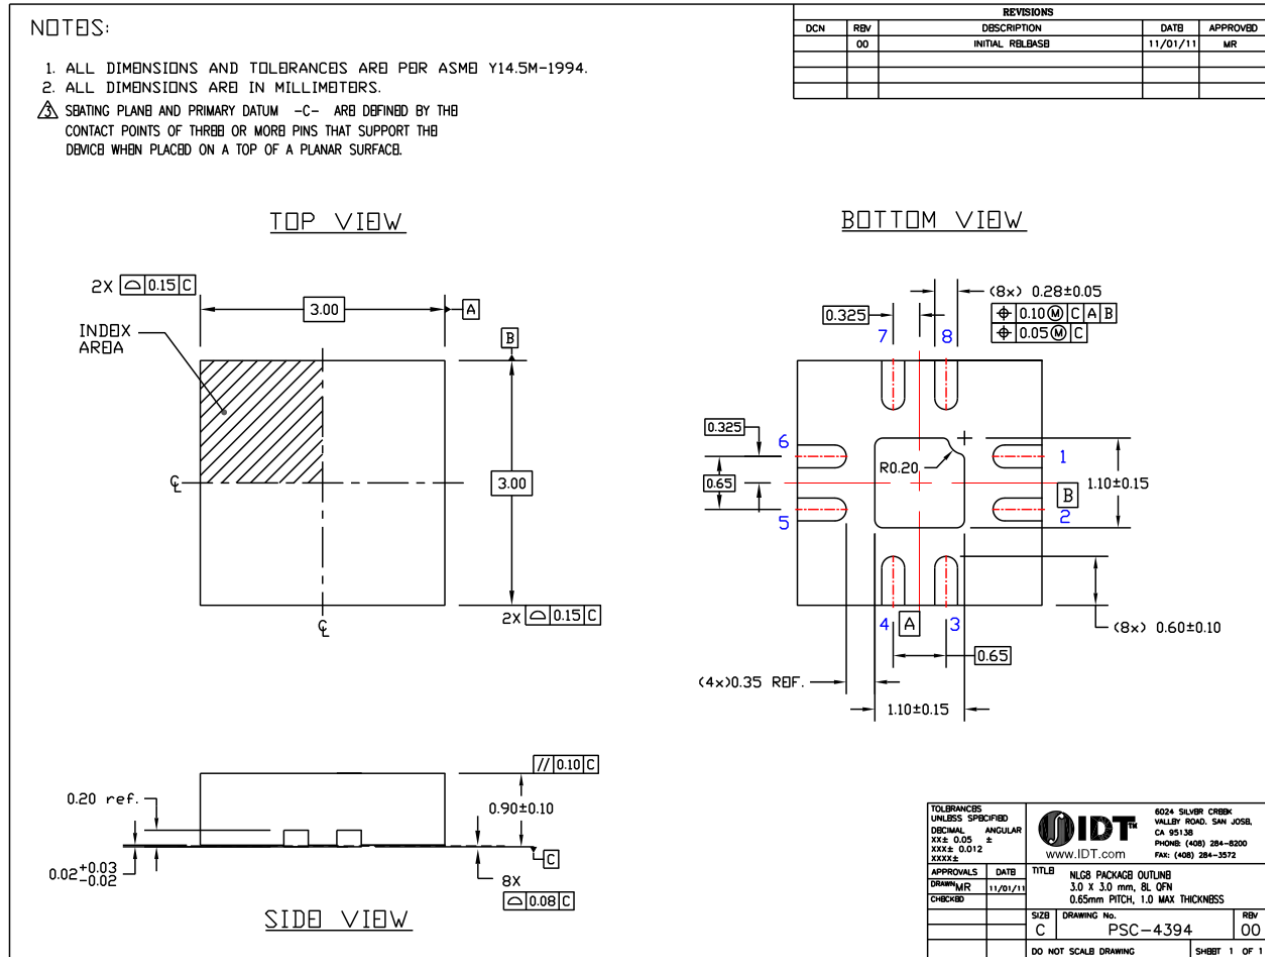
Package Outline Drawing (NLG8 QFN-8 3.0mmx3.0mmx1mm 8-ld, 0.65mm pitch)
